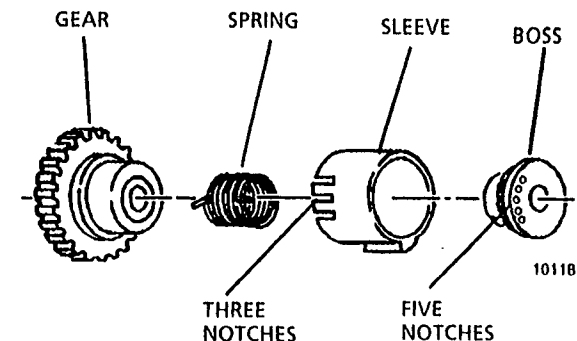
Removing the Boss, Spring, Sleeve, and Gear
